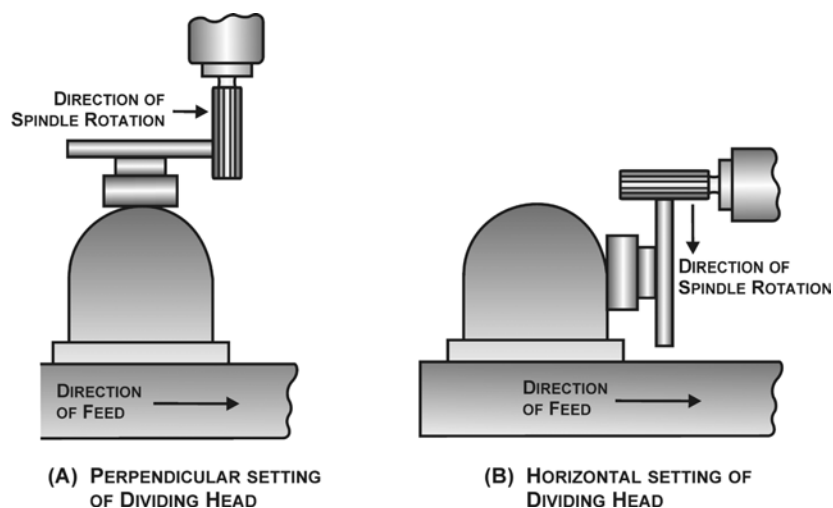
, Cam milling - perpendicular and parallel setting.
